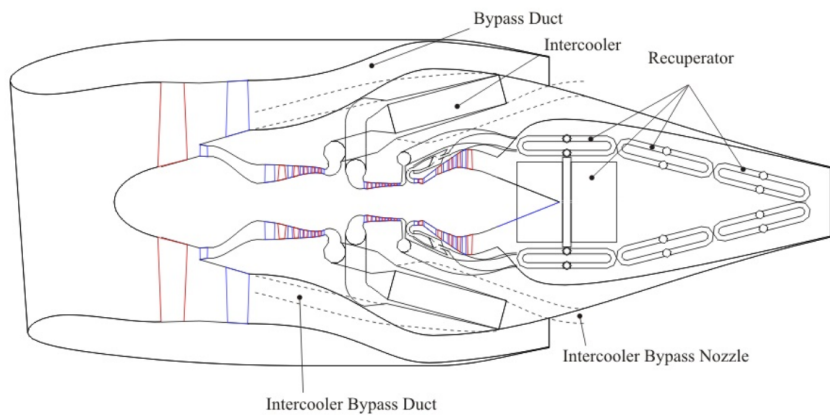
Mechanical design and basic component layout of the IRA engine [17].
